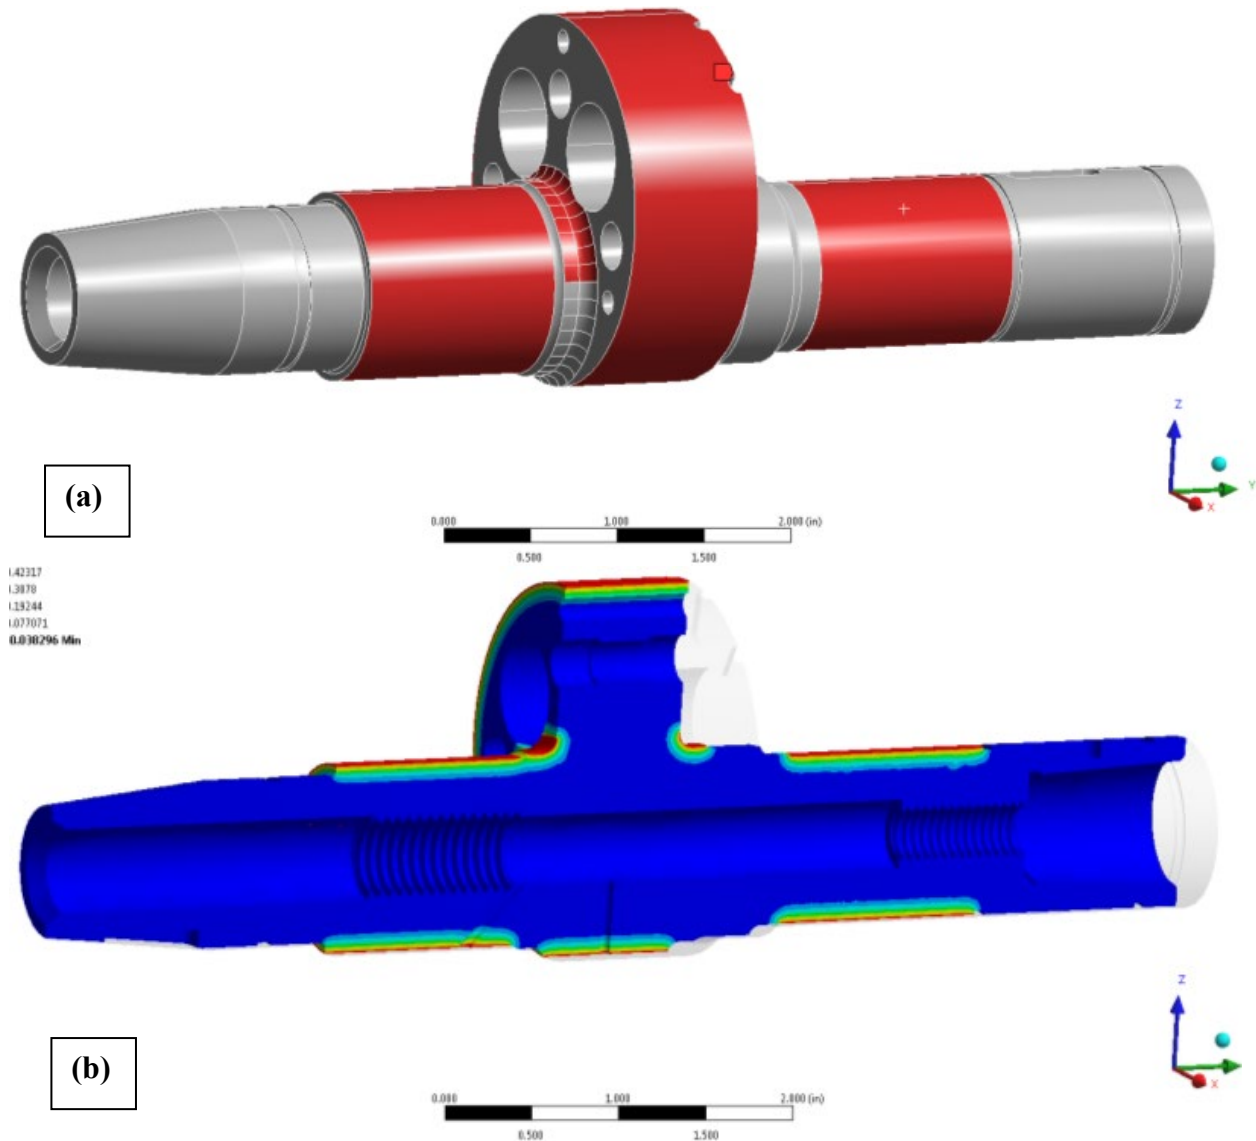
Laser Peen Straightening of Wankel Crankshaft: (a) laser peening pattern; (b) simulation of the laser peened form.
